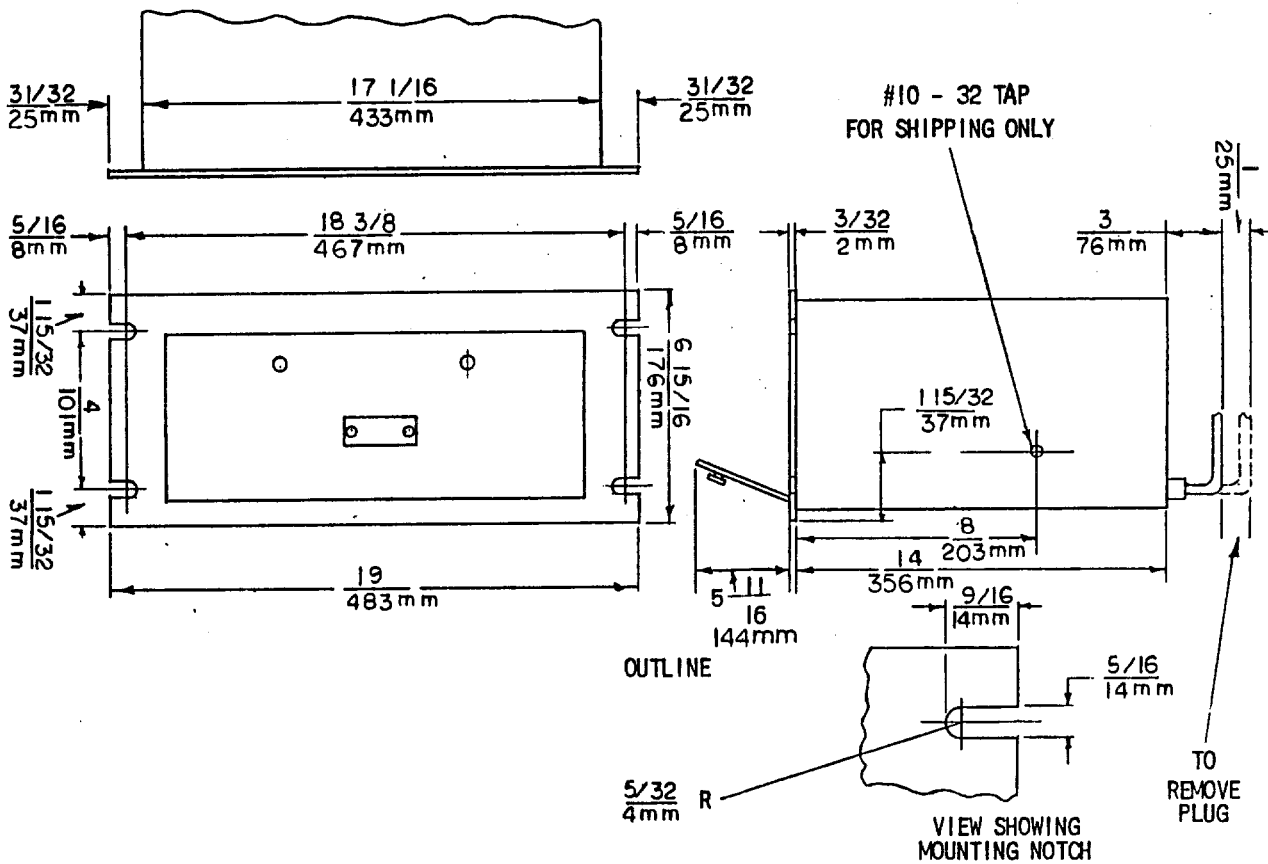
(0227A2037) Outline and Mounting Dimensions for the SLA54K Relay
